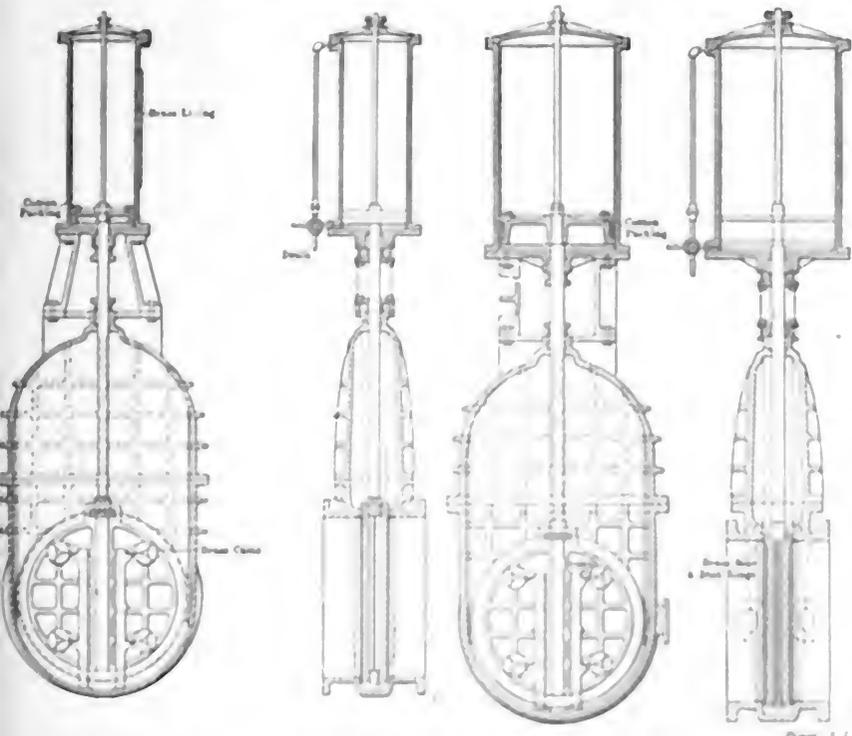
SECTIONAL VIEW OF HYDRAULIC VALVES
